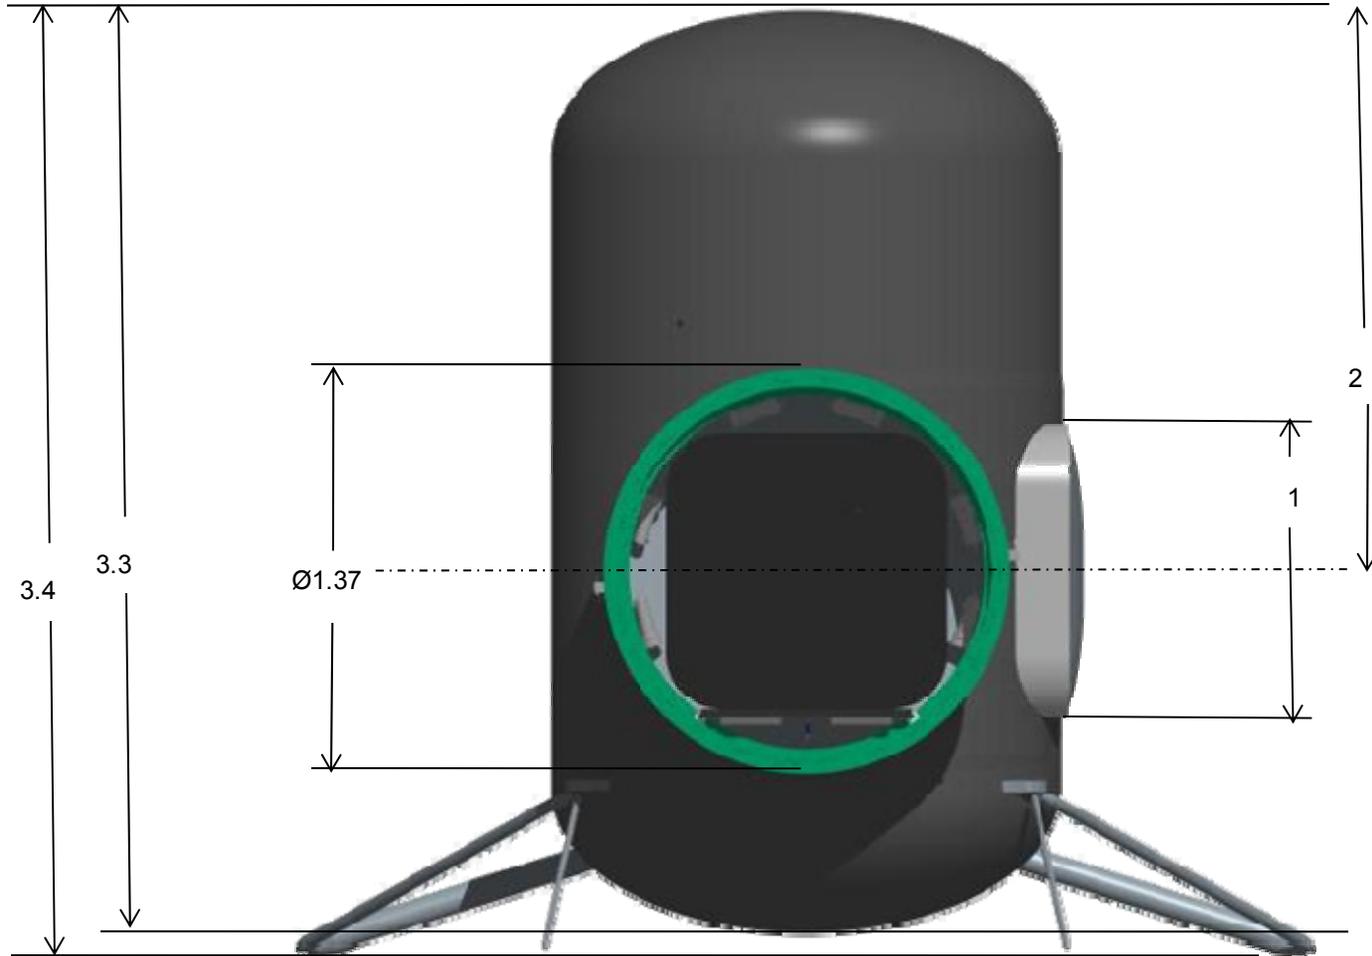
Tunnel view of overall dimensions of airlock used in mock-up fabrication (dimensions in meters).
